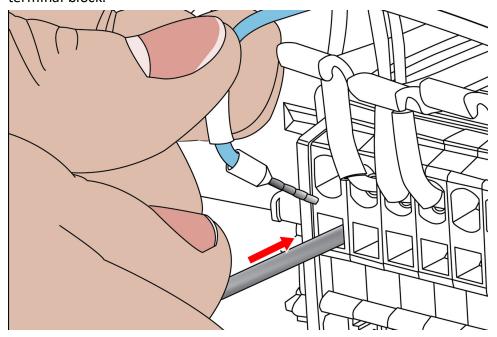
Use a flat-blade screwdriver to open the terminal clip and insert the wire.
